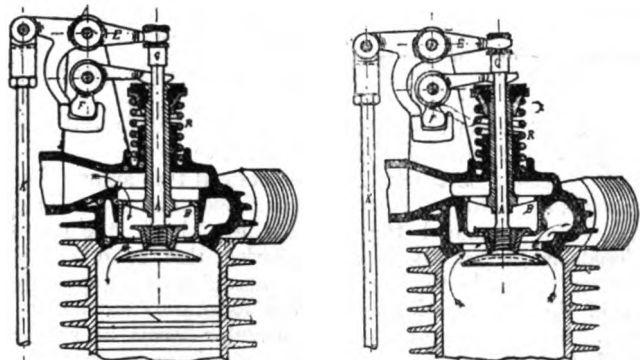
Sectional Elevation of Cylinder Head of D.S.R. Car, showing the concentric inlet and exhaust valves. The first view shows the inlet valve open and in the second the engine is exhausting.
